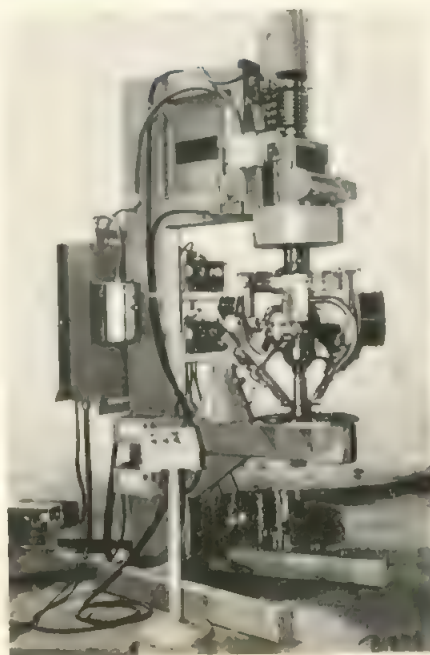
A similar unit is known as a nozzle welder. It is portable and operates on larger-diameter pieces. It is used to weld nozzles into the wall of pressure vessels. Usually, a groove weld is made and special methods are used to follow the weld joint.
